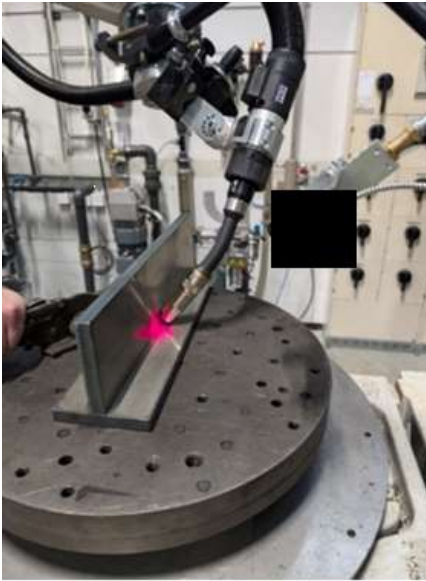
Test welding run setup with steel structure for fillet welding, active welding torch, camera equipment and some non-disclosed additional equipment.
